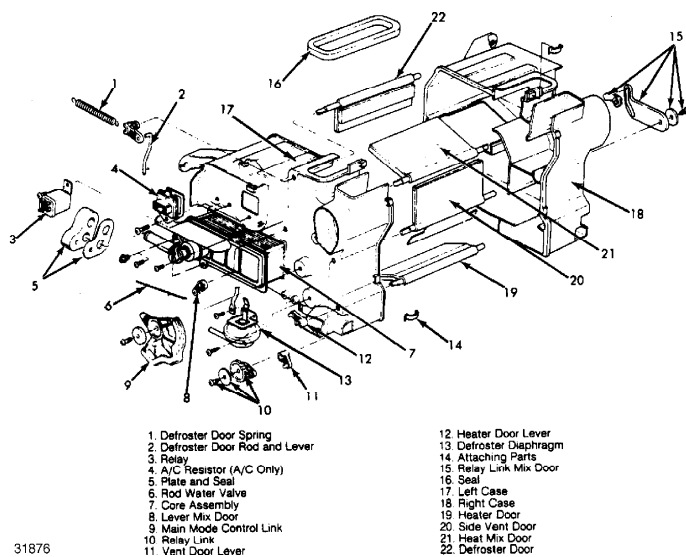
Exploded View of Heater Unit P'UP and Trooper models only.
